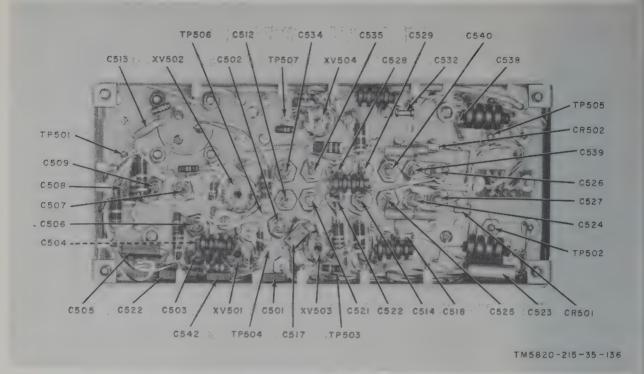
100- and 250-kc generator, bottom view showing capacitors.
